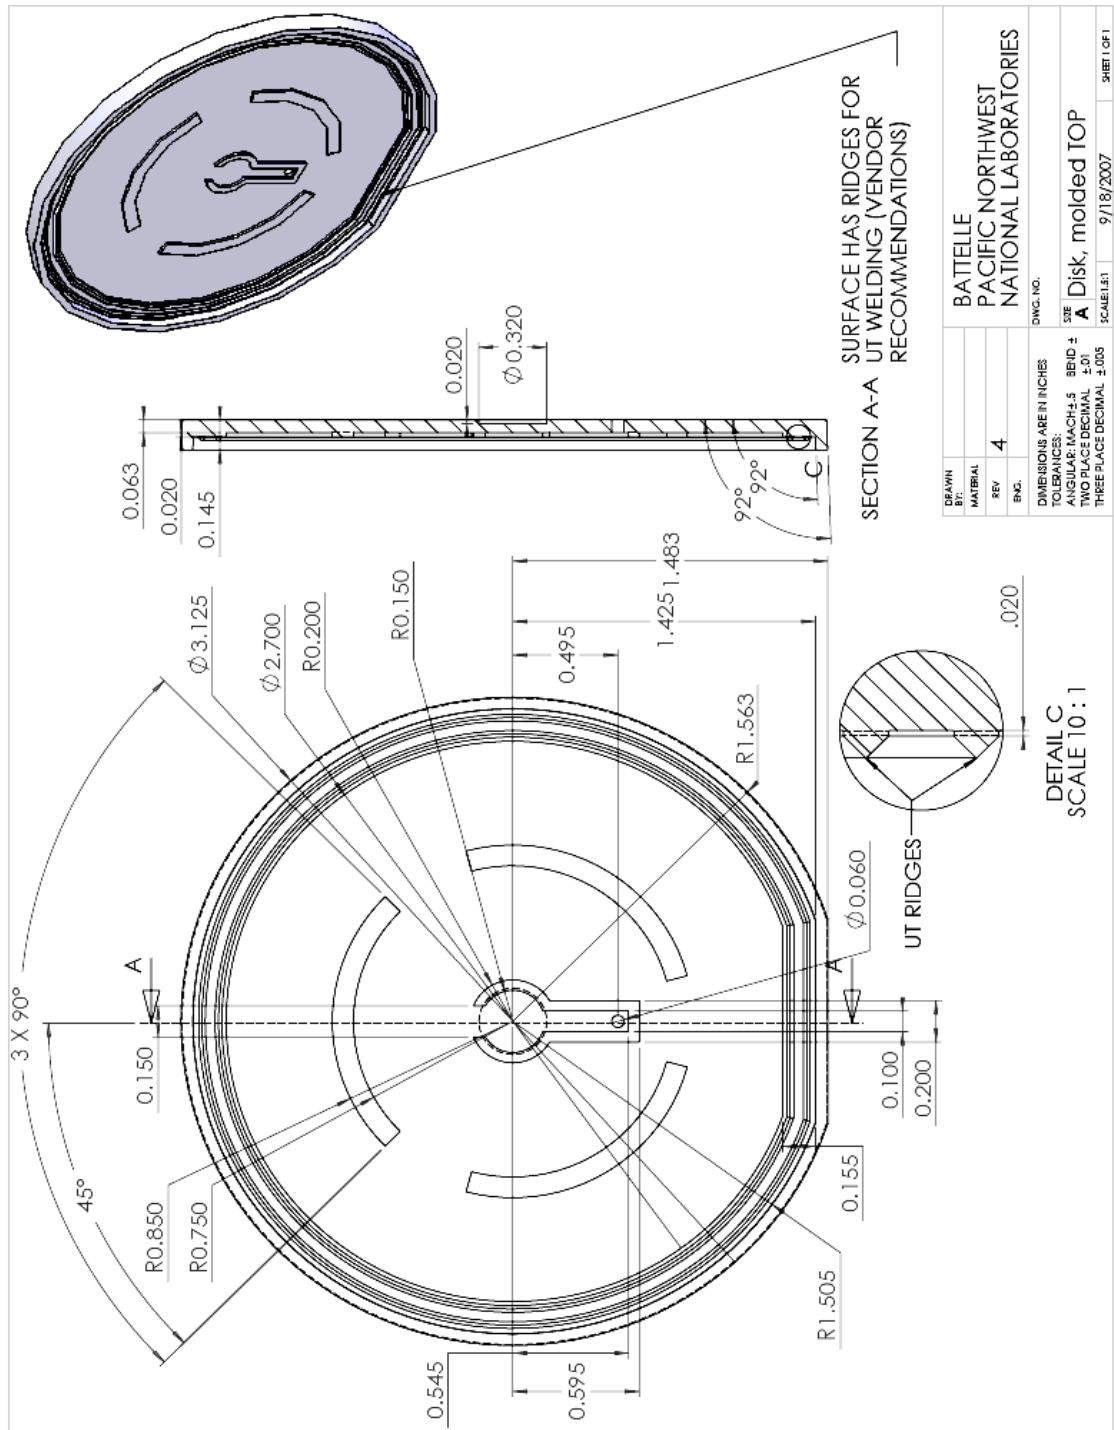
Dimensional drawing of DCE cartridge molded top detail.
